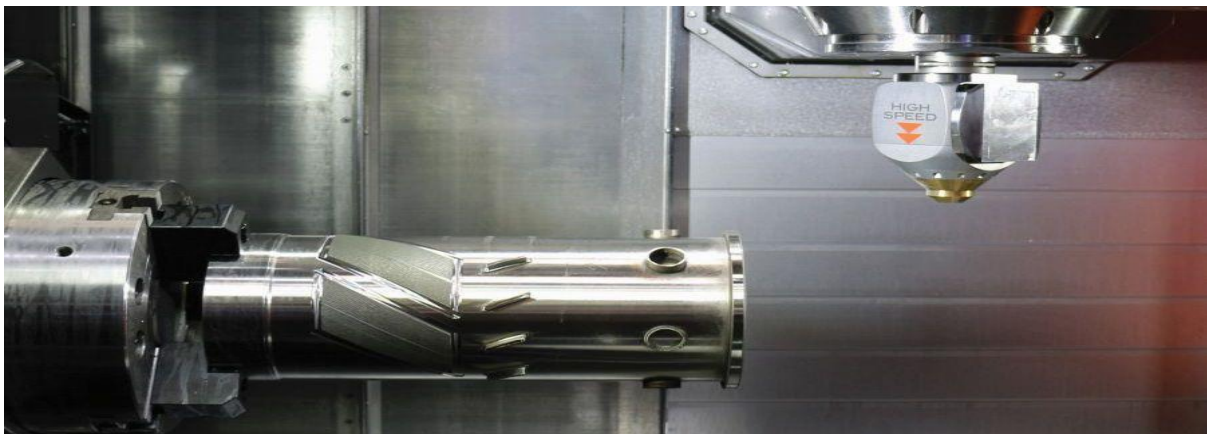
Surfaces or features can be additively applied to a part that is otherwise machined
